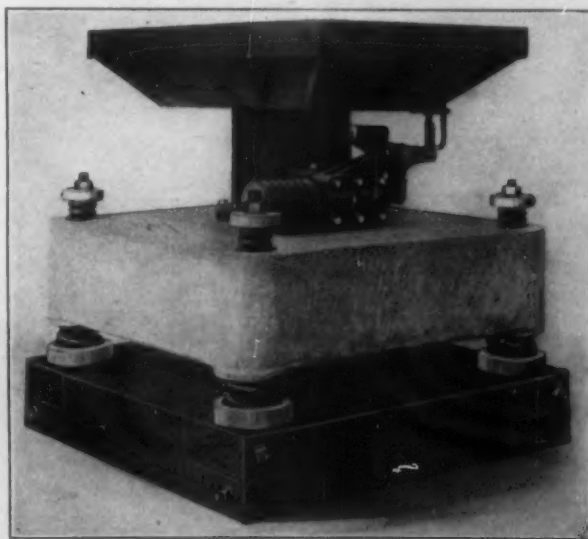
The Osborn No Shock Jolt Molding Machine.
